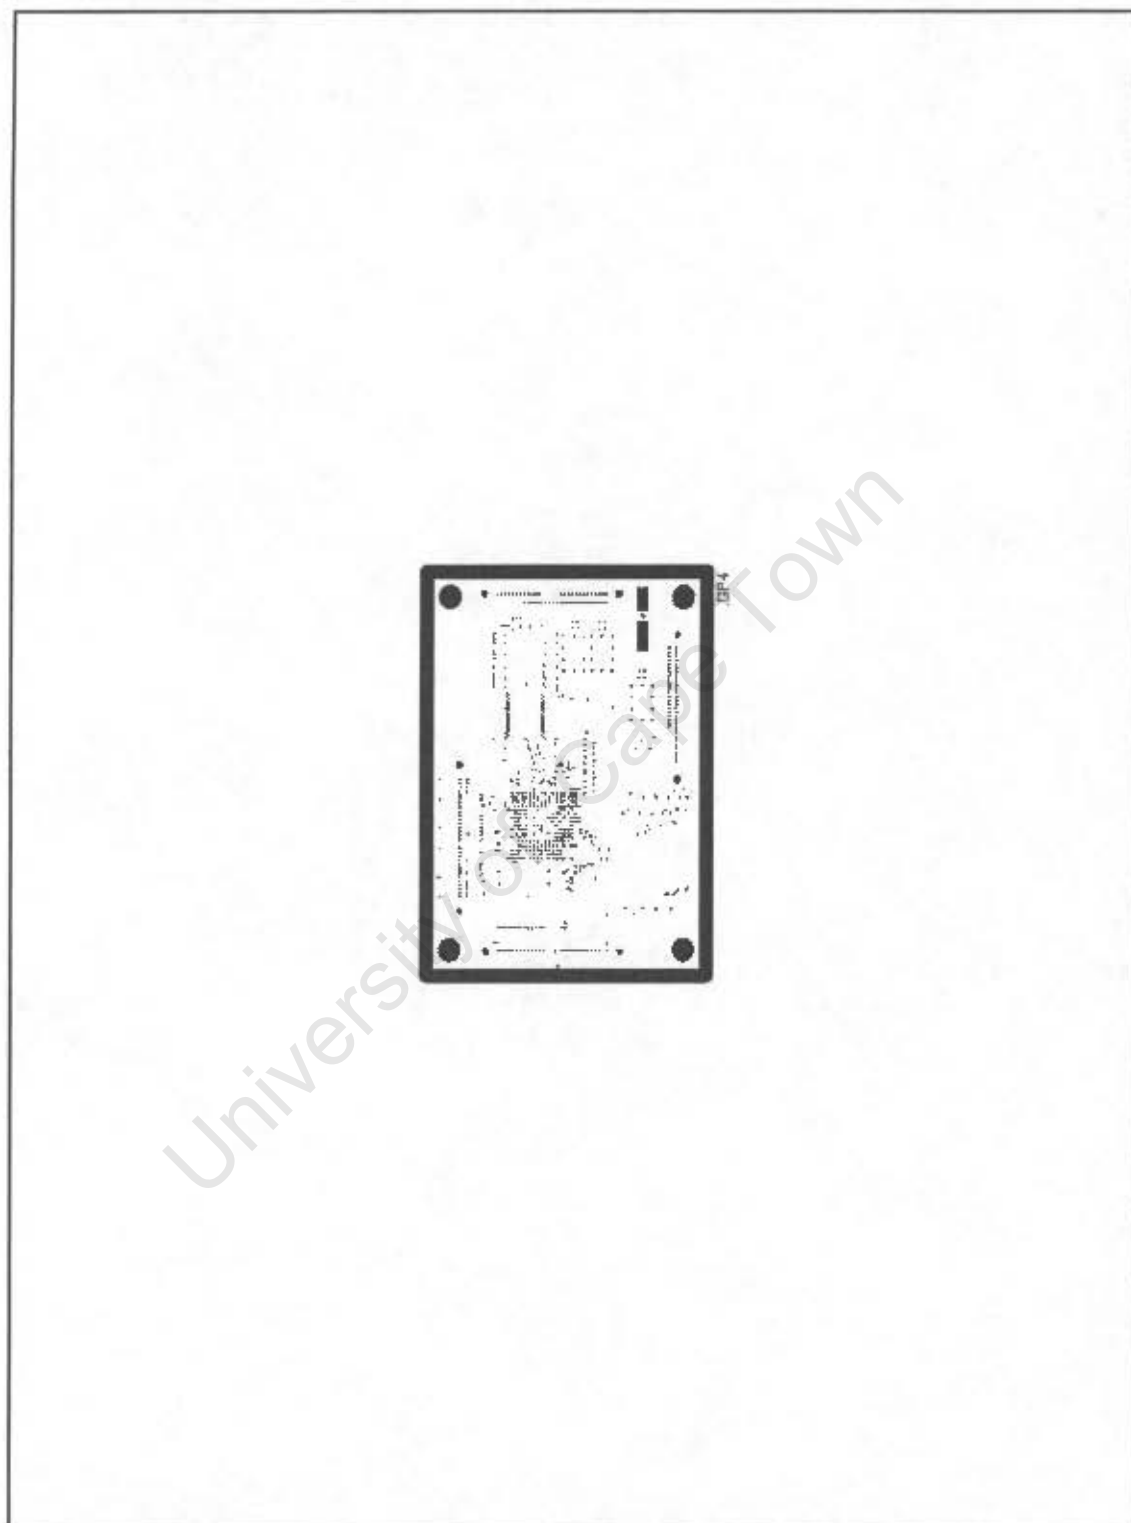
RUI Module PCB Layout - +2.5V Supply Plane
